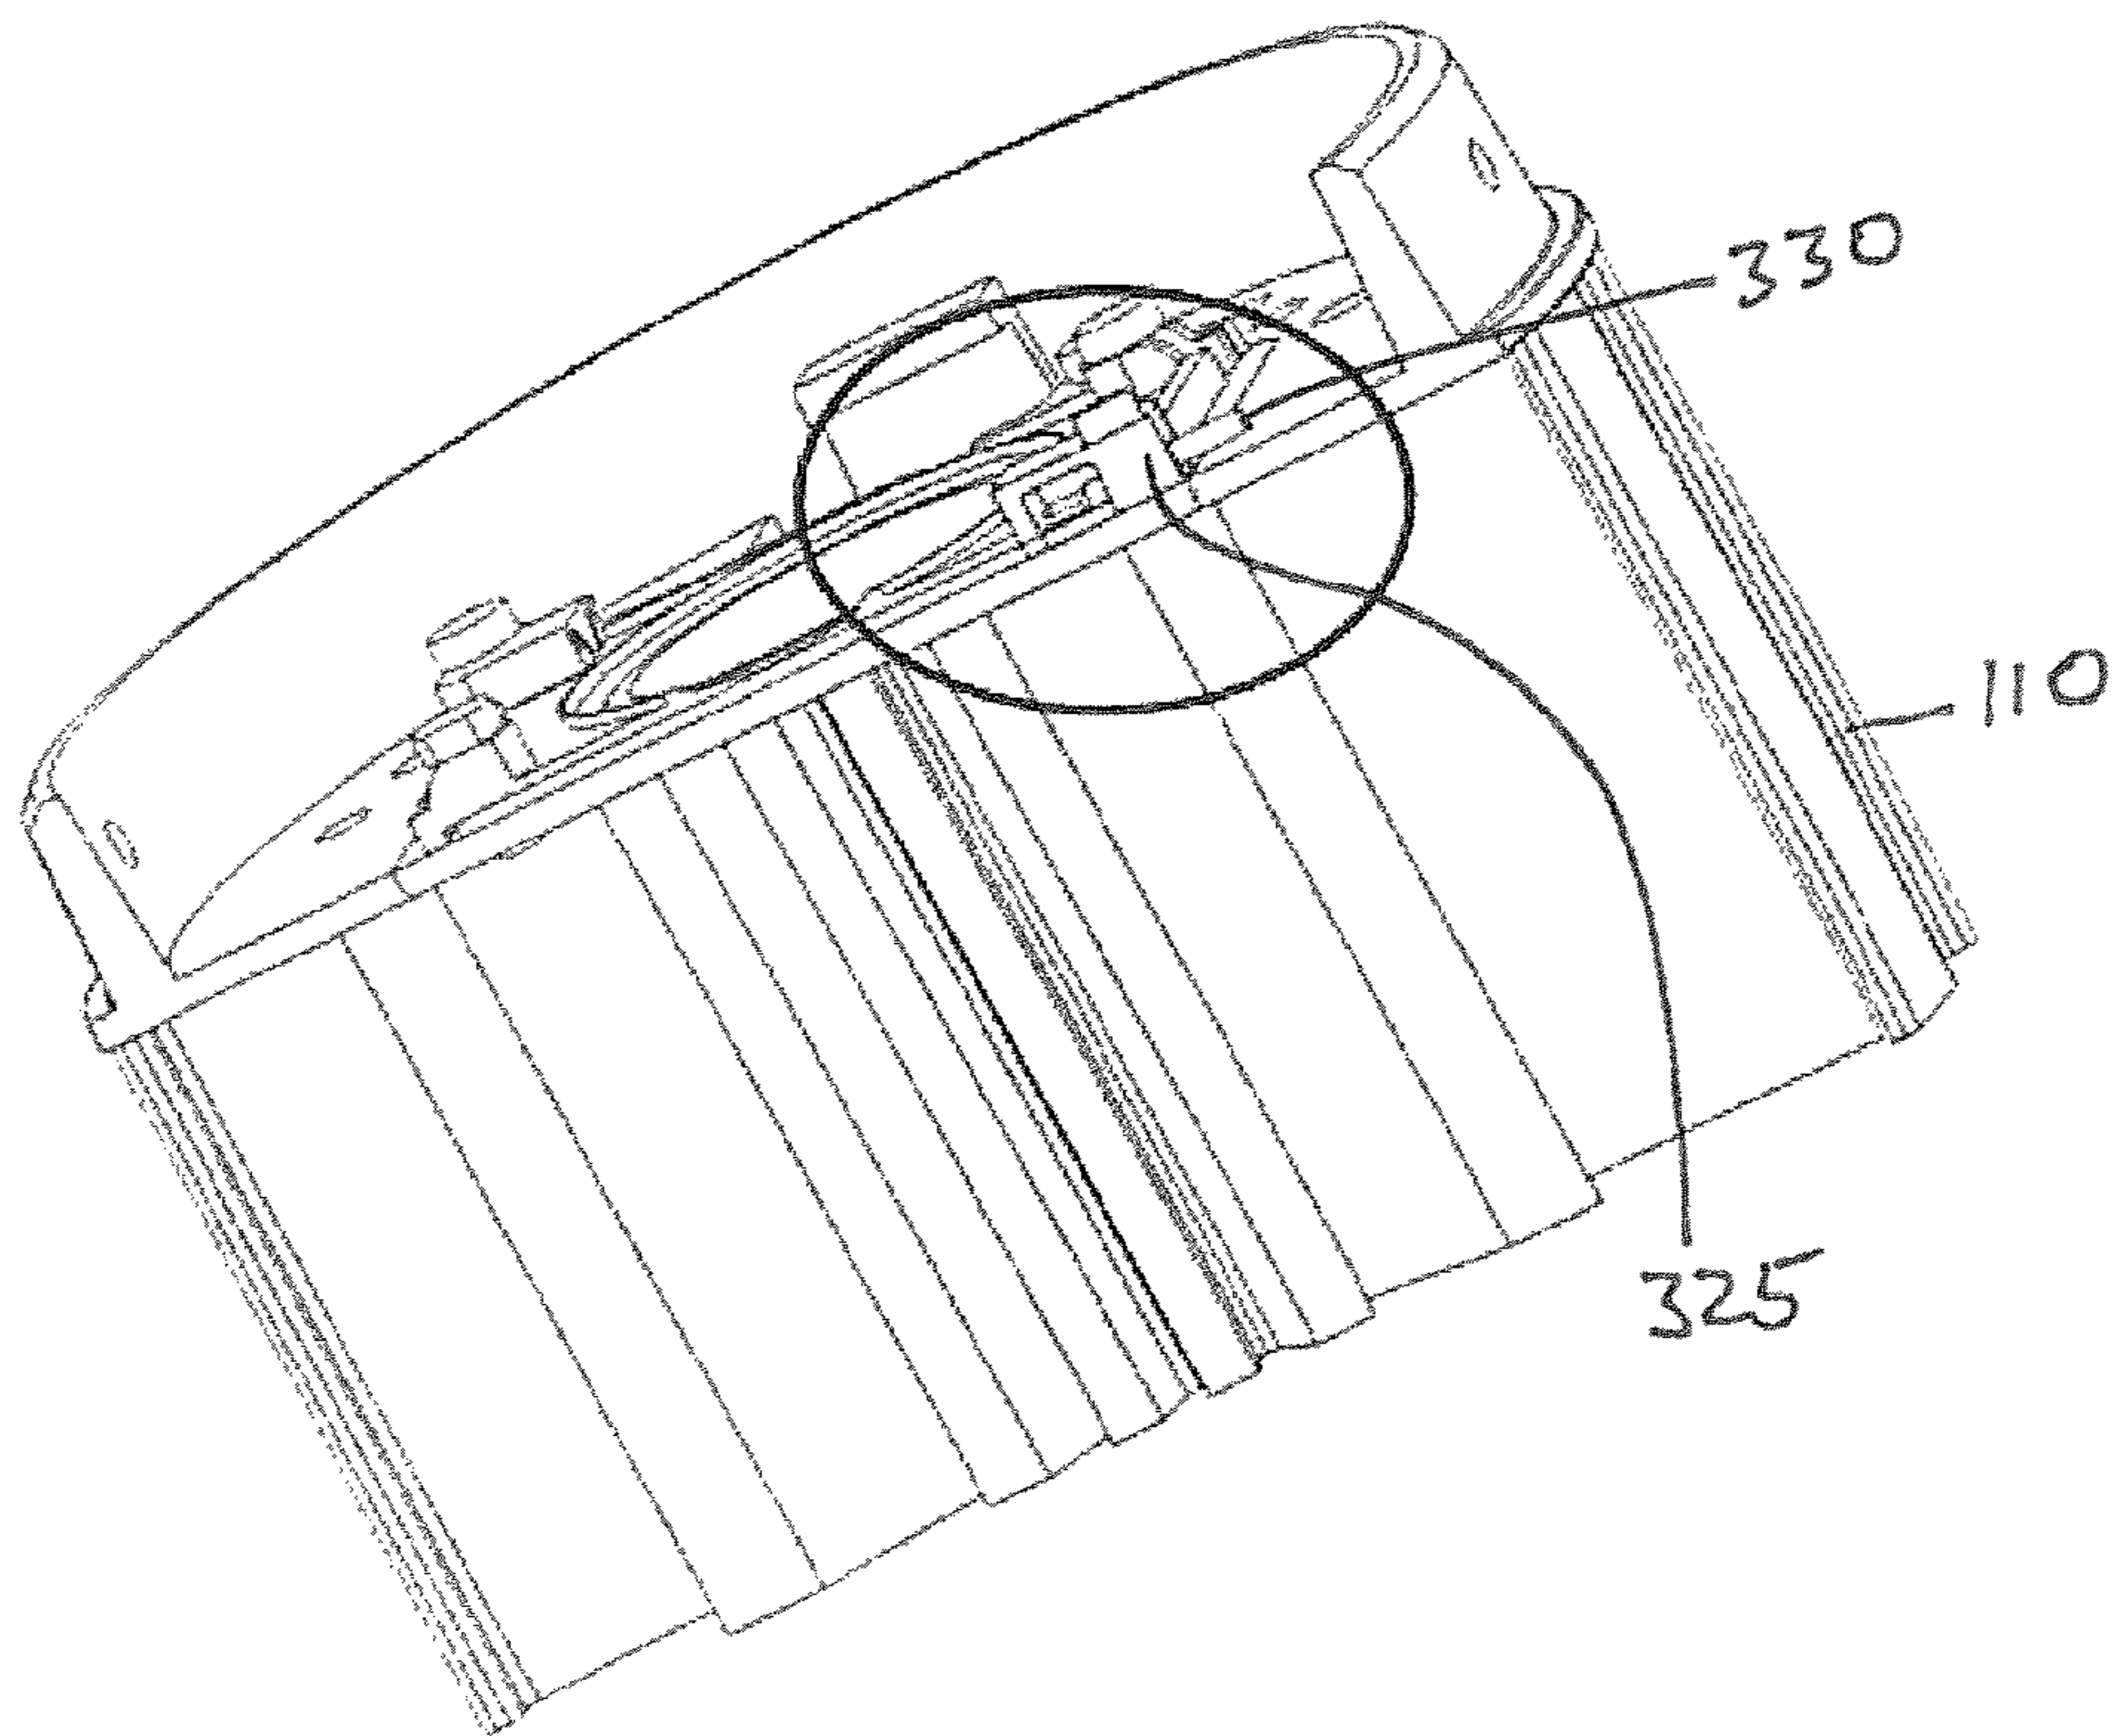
LED Holder, Section View illustrating Protective cover for Solder Connection
